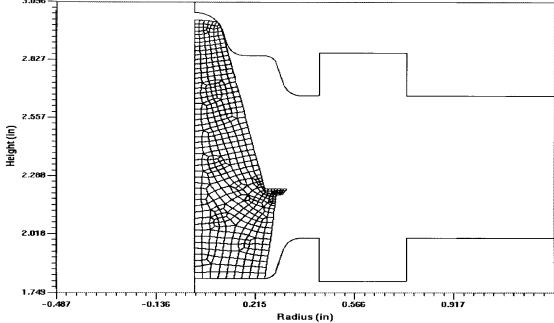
Preformed Part in Modified Finish Dies Before Forging
